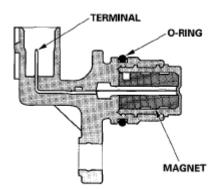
Sectional View Of Camshaft Position (CMP) Sensor B Courtesy of AMERICAN HONDA MOTOR CO., INC.
